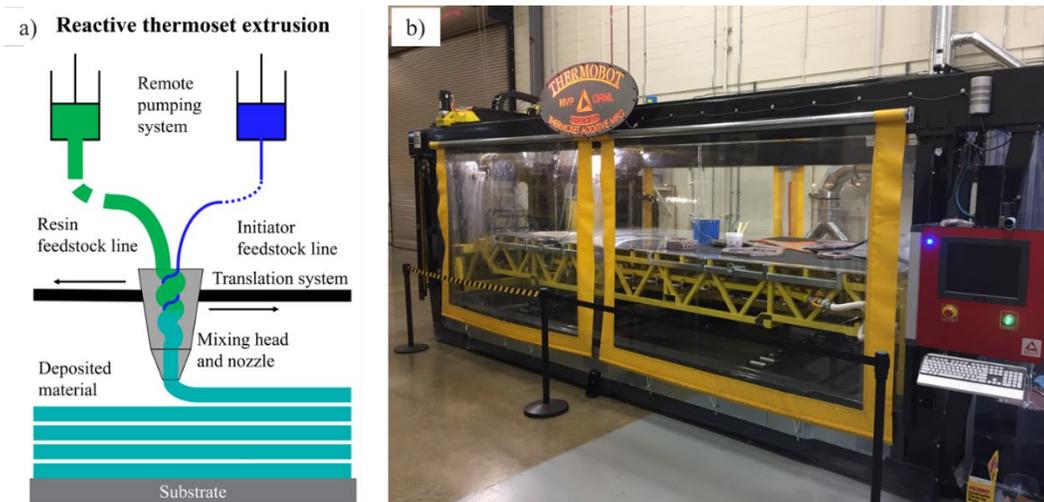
a) Reactive thermoset extrusion schematic b) MVP printer at ORNL
